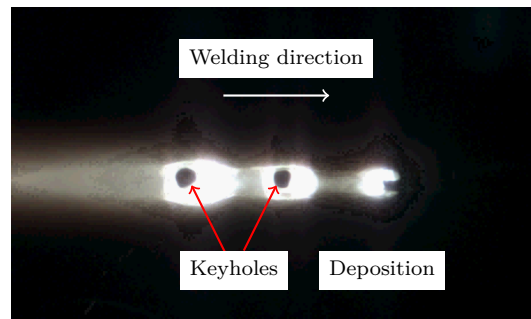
Live image of the combined welding process: The filler metal insertion and the two weld pools are observed.
